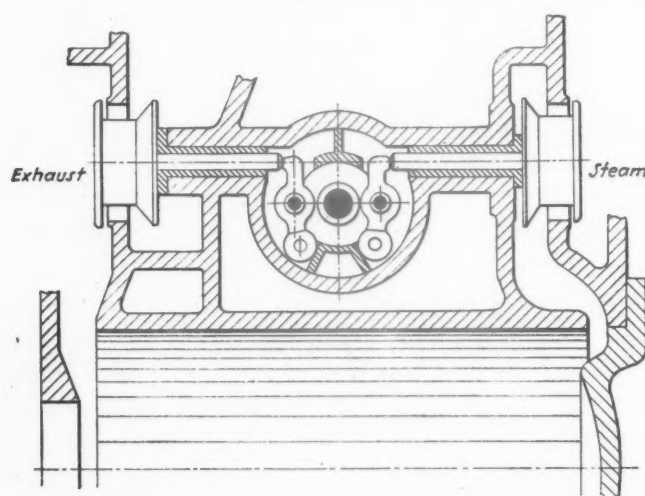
Sketch showing the operation of the Lentz-Dabeg poppet-valve gear
